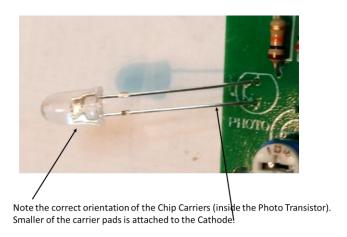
Showing the "Chip Carrier" inside the Photo Transistor. Often used to identify the correct orientation after assembly or during re-work.
